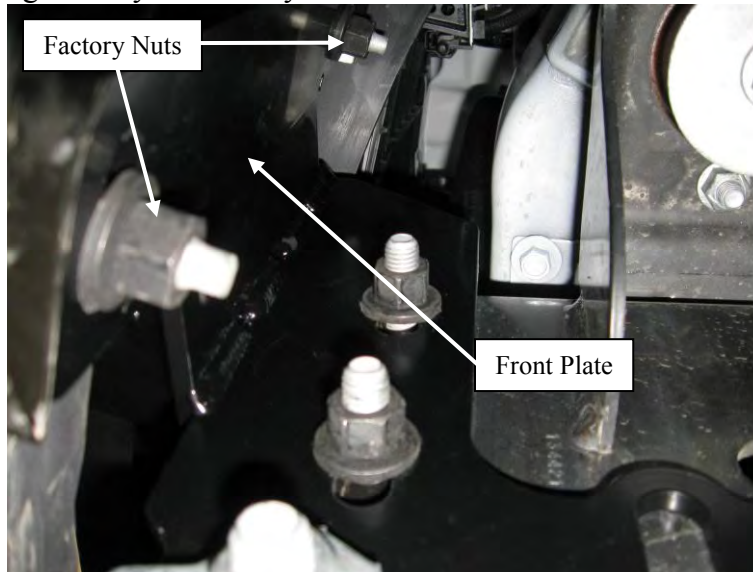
Bolts attaching Frame Extension Bracket to bumper (viewed from center of vehicle, looking outward)
